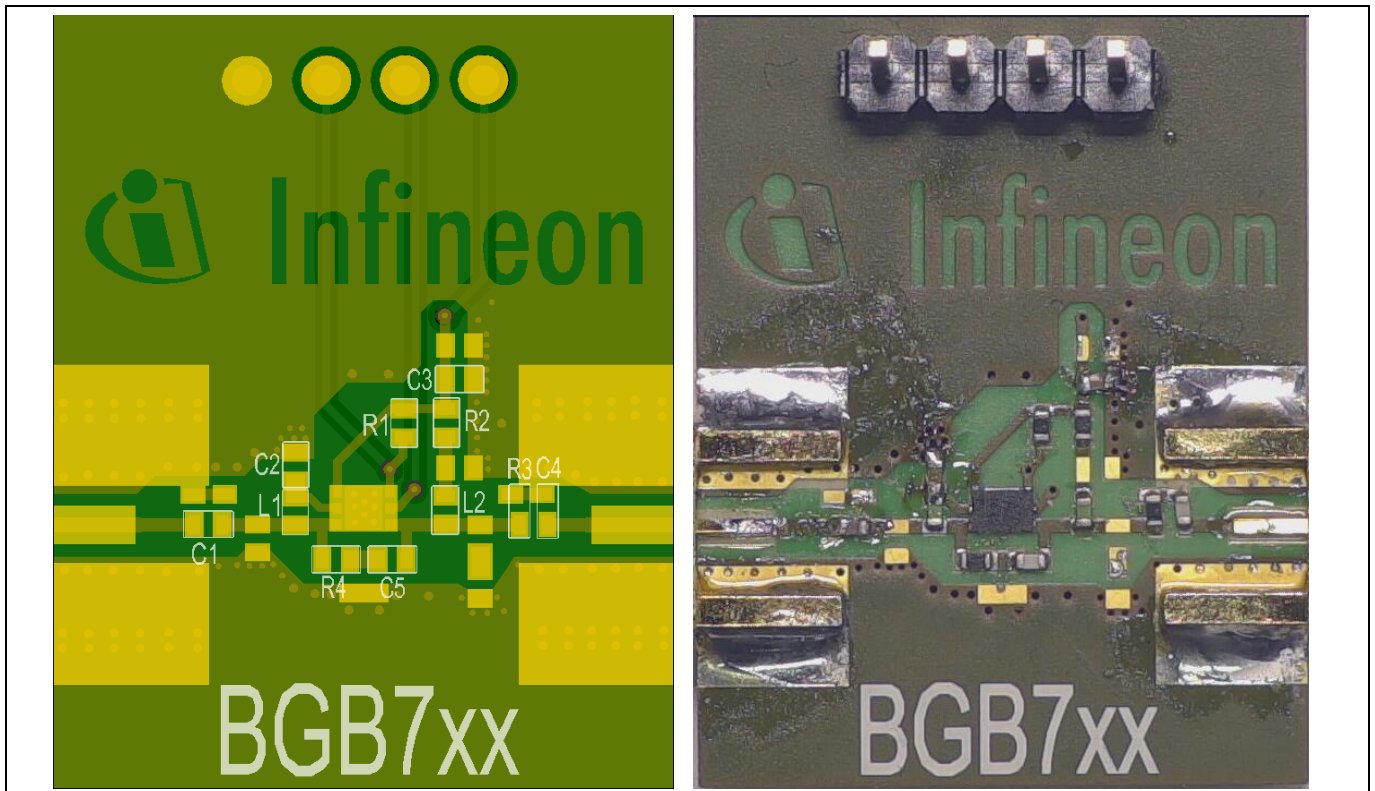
PCB layout and photo of the [BGB707L7ESD](#) wide-band GNSS LNA evaluation board
